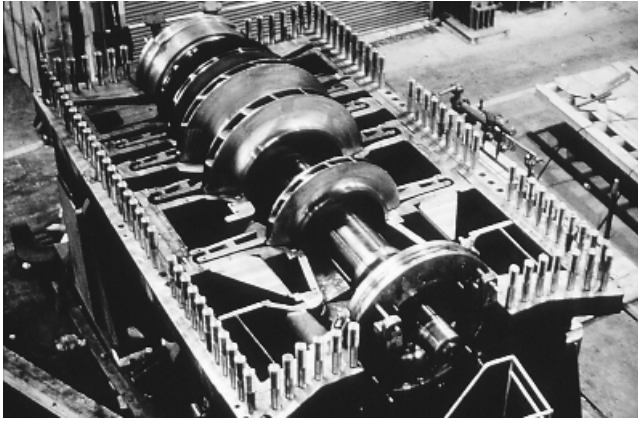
Horizontally split fabricated compressor, lower casing half. (*Dresser-Rand Company, Olean, N.Y.*)
